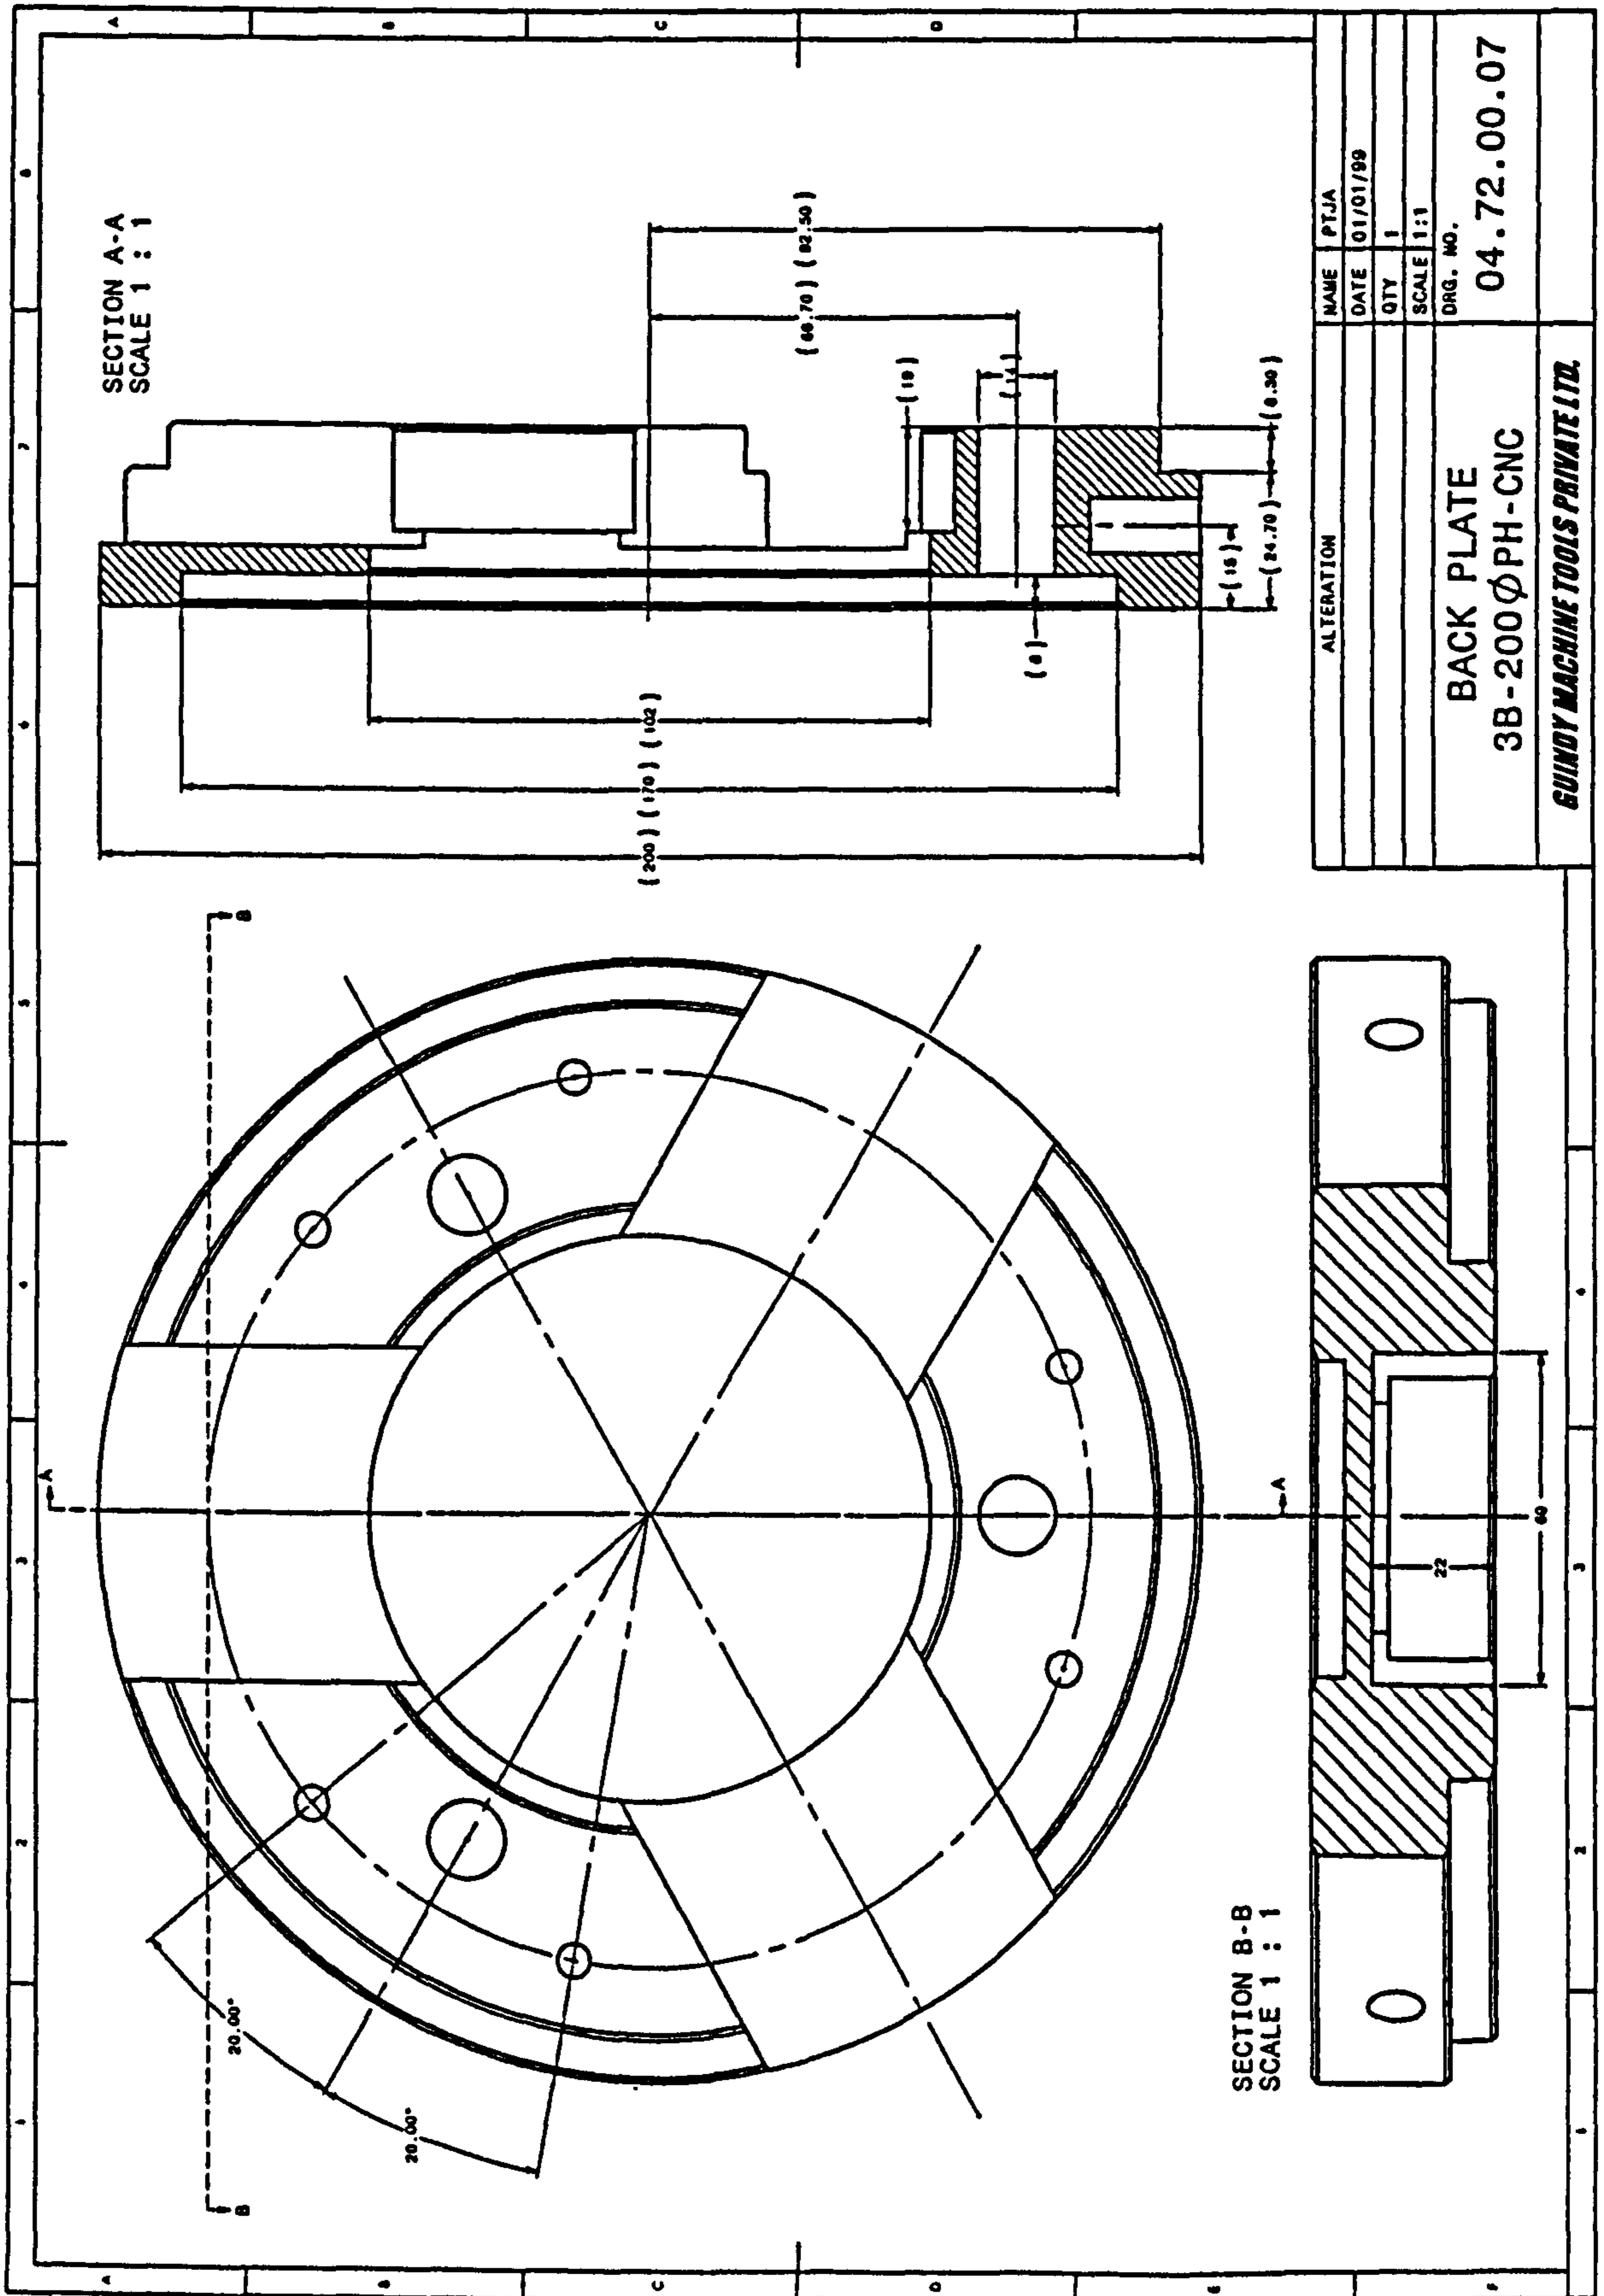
GMT Back Plate – Pro/ENGINEER Drawing
